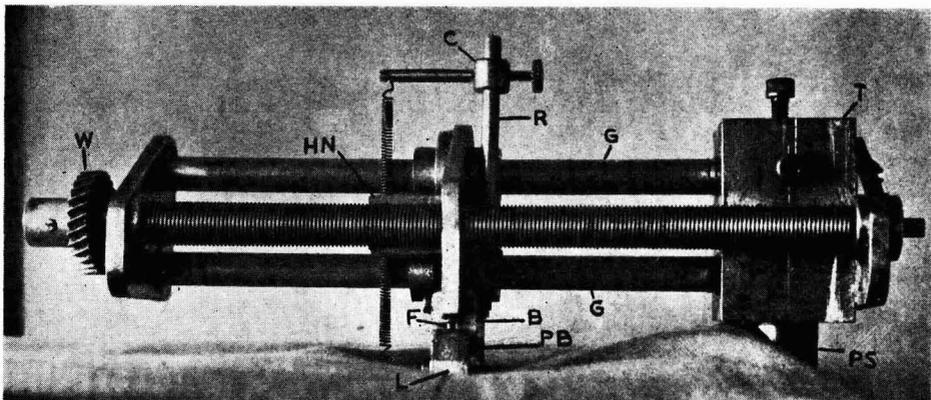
LATHE MECHANISM TO SPACE THE POSITION OF THE CUTTER CONTINUOUSLY AS THE CUTTER ROTATES [B, bracket carrying the cutterhead; C, collar; F, set screw; G, G, guide rods; HN, half-nut; L, lever; PB, pin block; PS, pivot shaft; R, guide rod; T, terminal block; and W, worm wheel]
